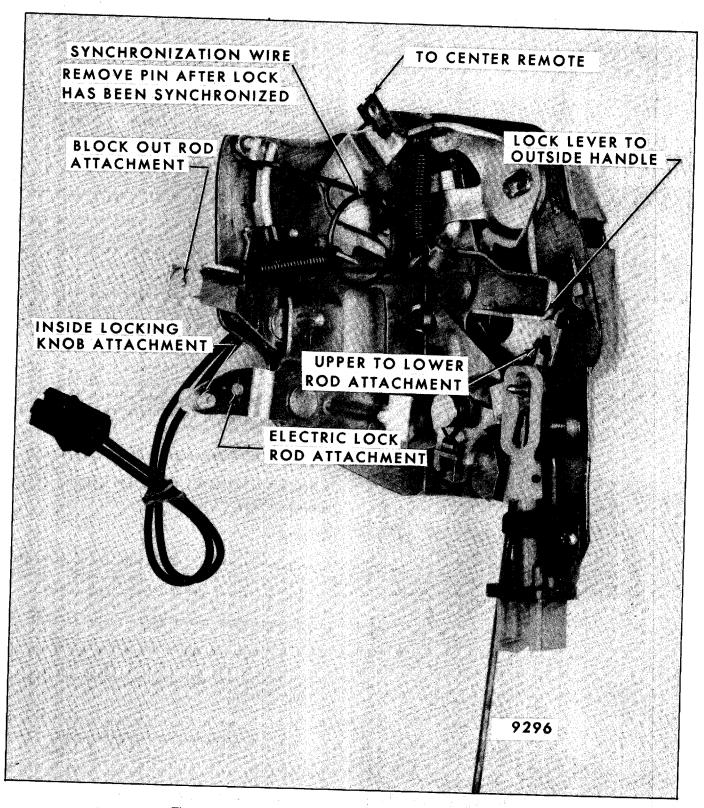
Tailgate Upper Right Lock and Synchronization Wire
